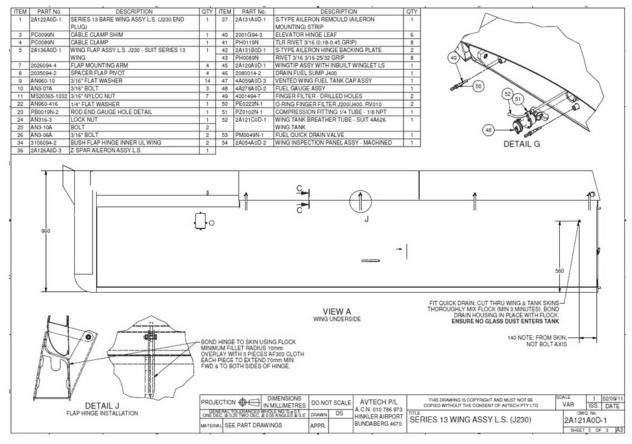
J230 Wing Assembly Sheet 2, Ser 13 (J230/J430)
